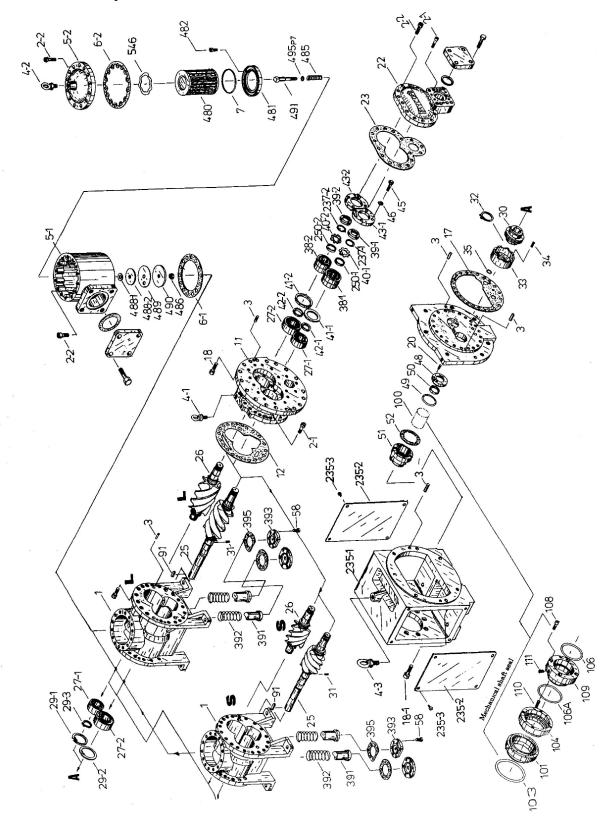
Development View of i125S/L Parts with Motor Spacer
